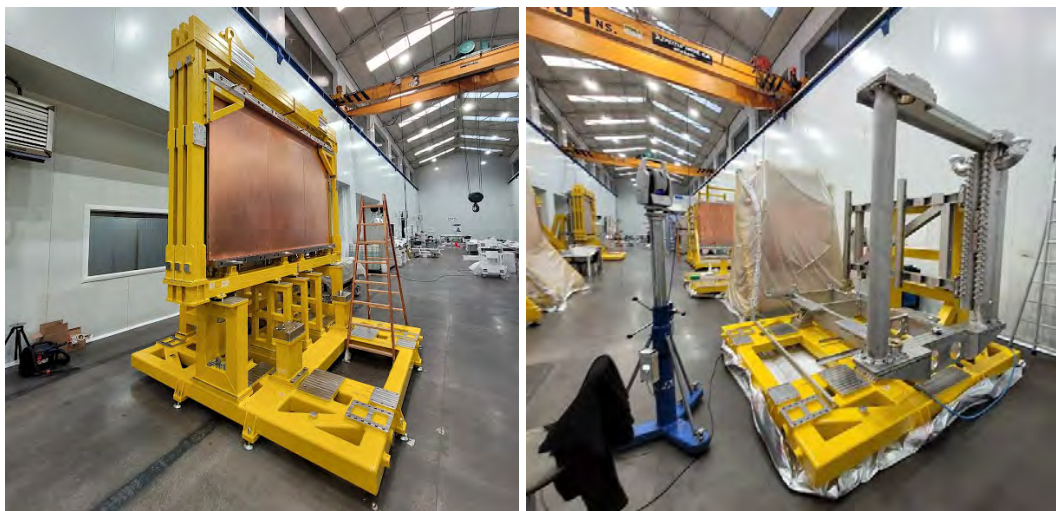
Dimensional Inspection activities guiding the assembly of Mitica Beam Line components.
